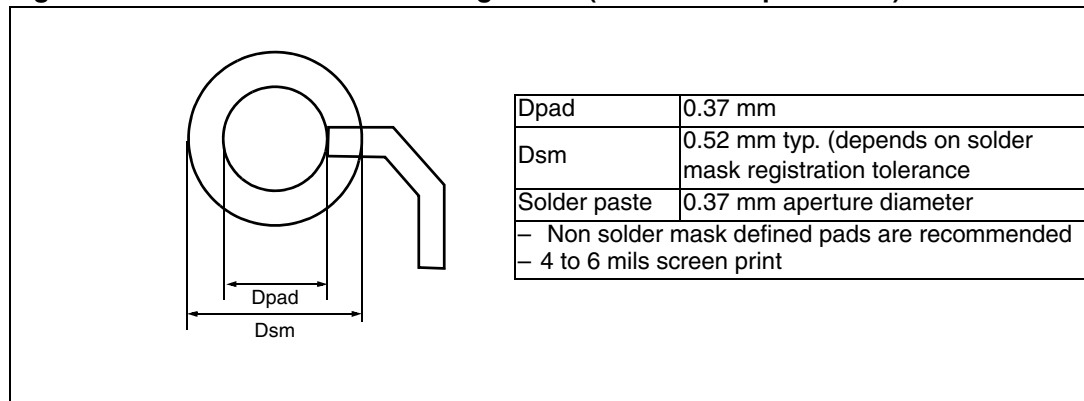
Recommended PCB design rules (0.80/0.75mm pitch BGA)
